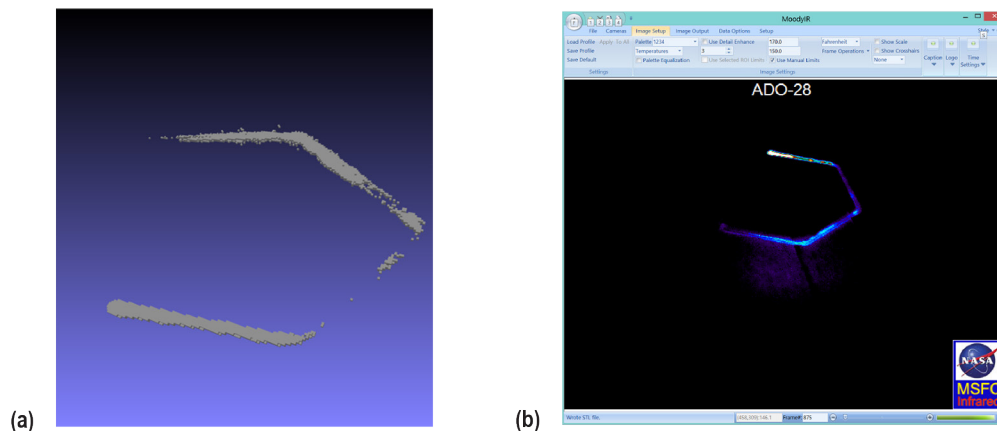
Test results of detecting additive manufactured part: (a) CAD image of printed part and (b) software display of infrared temperature of part.
